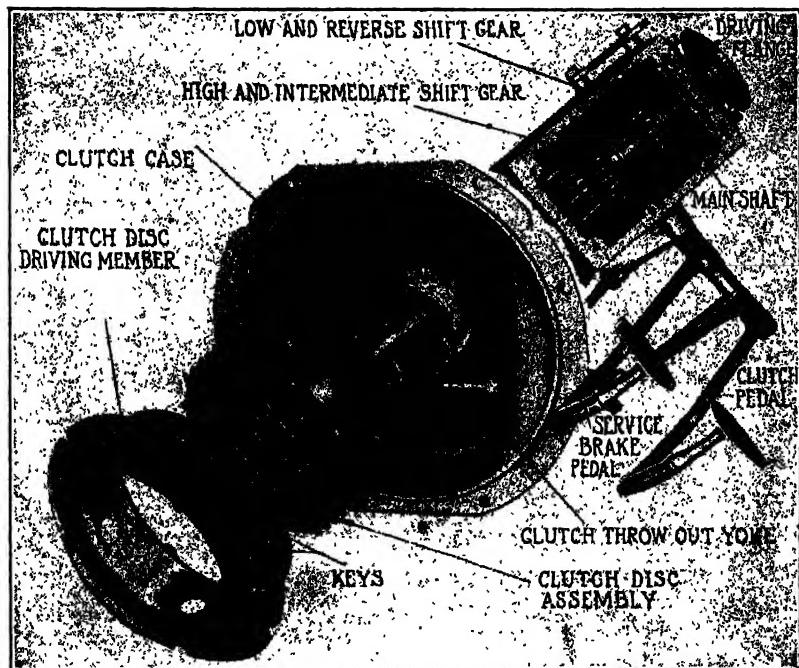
Clutch and Gearset of 1915 Cadillac Automobile.
